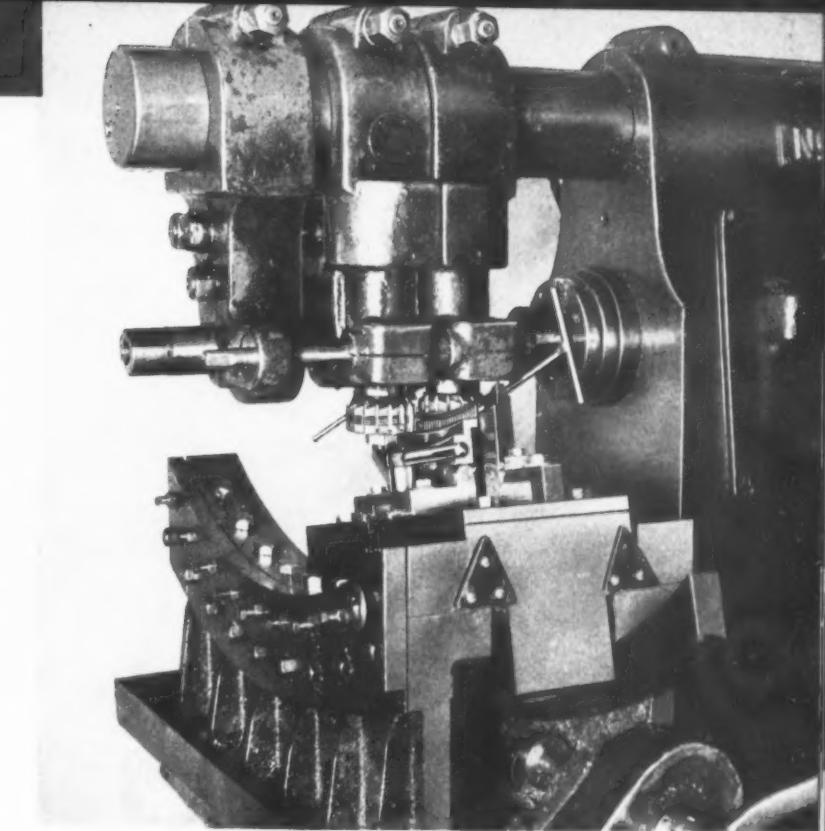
Set-up Employed in Milling Serrations on Both Sides of High-pressure, Side-locking Turbine Rotor Blades
